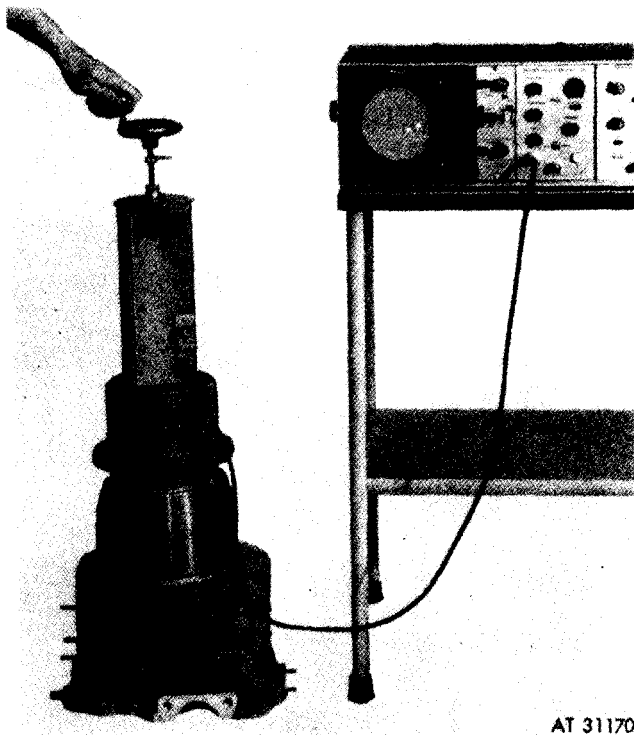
Ultrasonic search fixture installed in cylinder barrel mounting flange.
